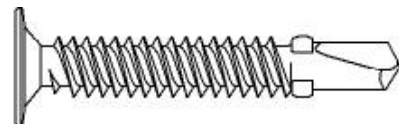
PWD101716P WAFER HEAD SCREW WITH WINGS
